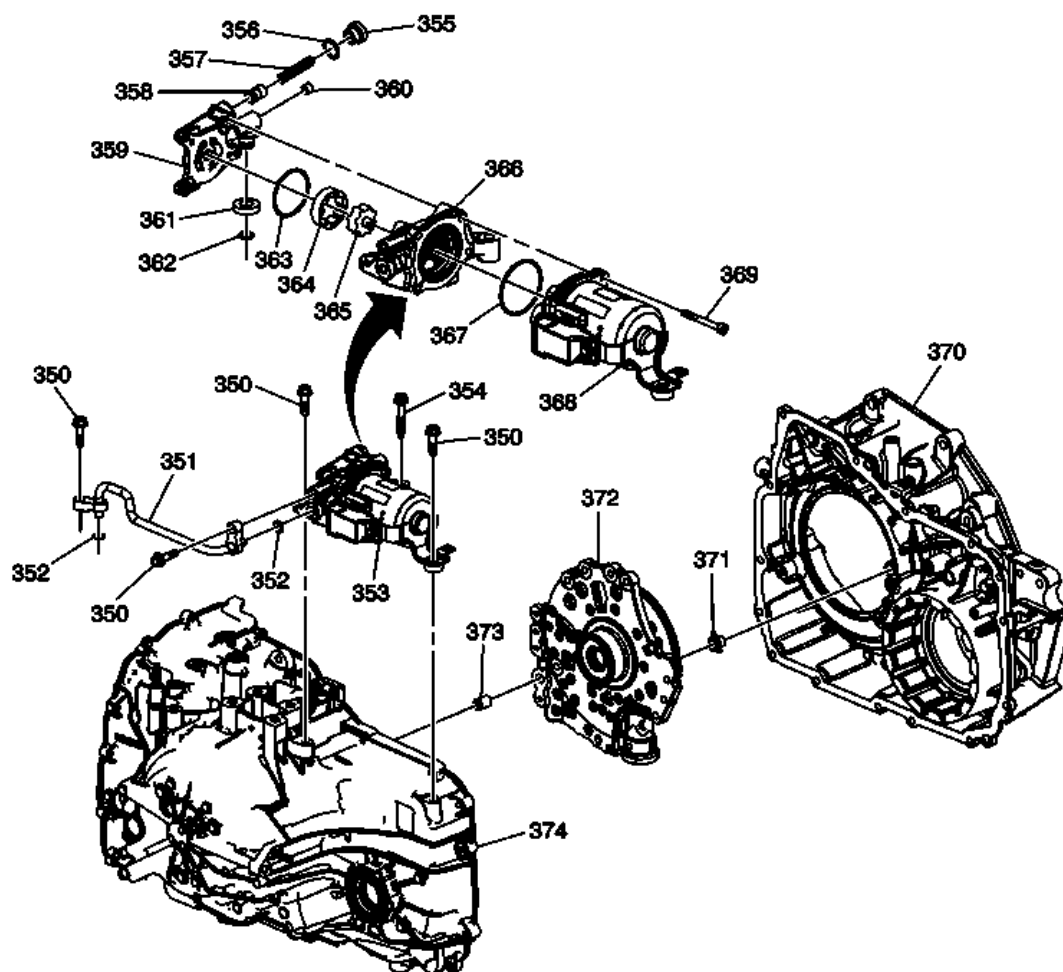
Auxiliary Fluid Pump and Hybrid Components -- Hybrid Models
